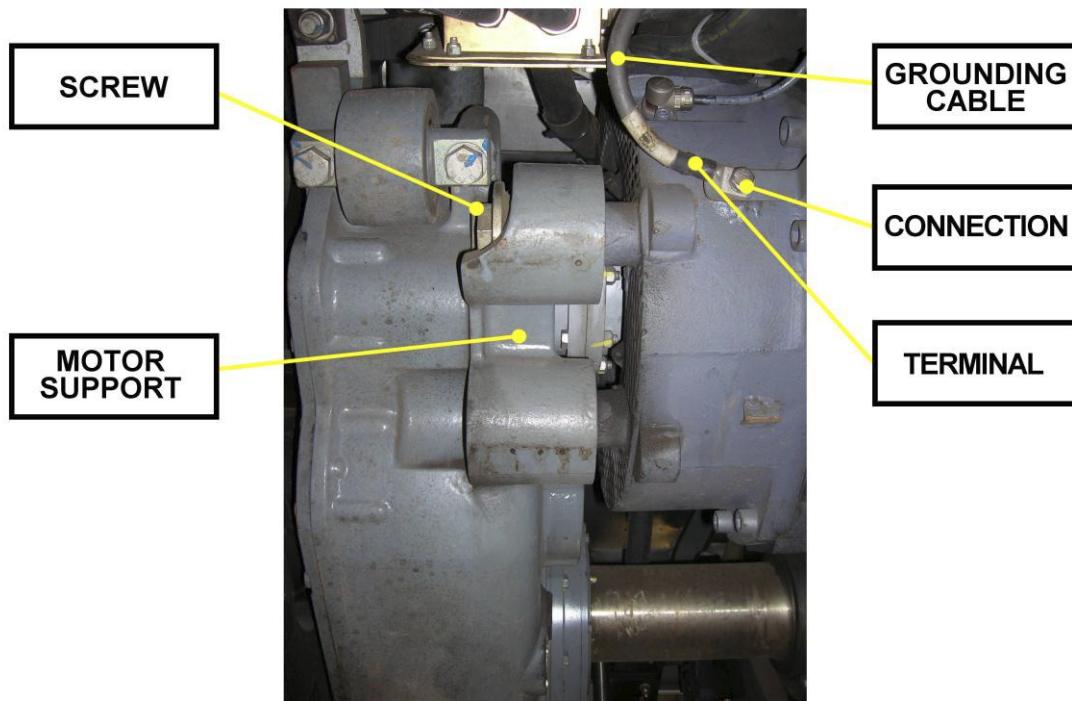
TRACTION MOTOR INSPECTION AT GEAR DRIVE END
